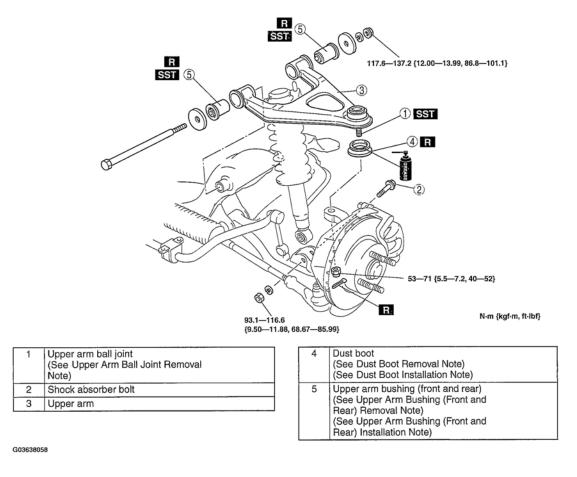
View Of Front Upper Arm & Torque Specifications Courtesy of MAZDA MOTORS CORP.
